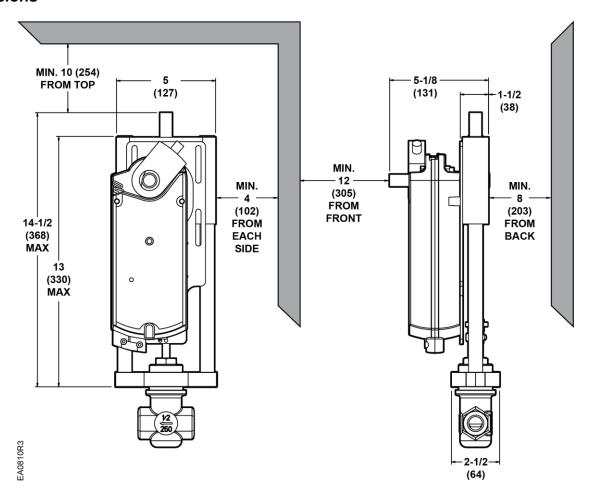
Dimensions of the Flowrite 599 Series Rack & Pinion Valve in Inches (Millimeters).
